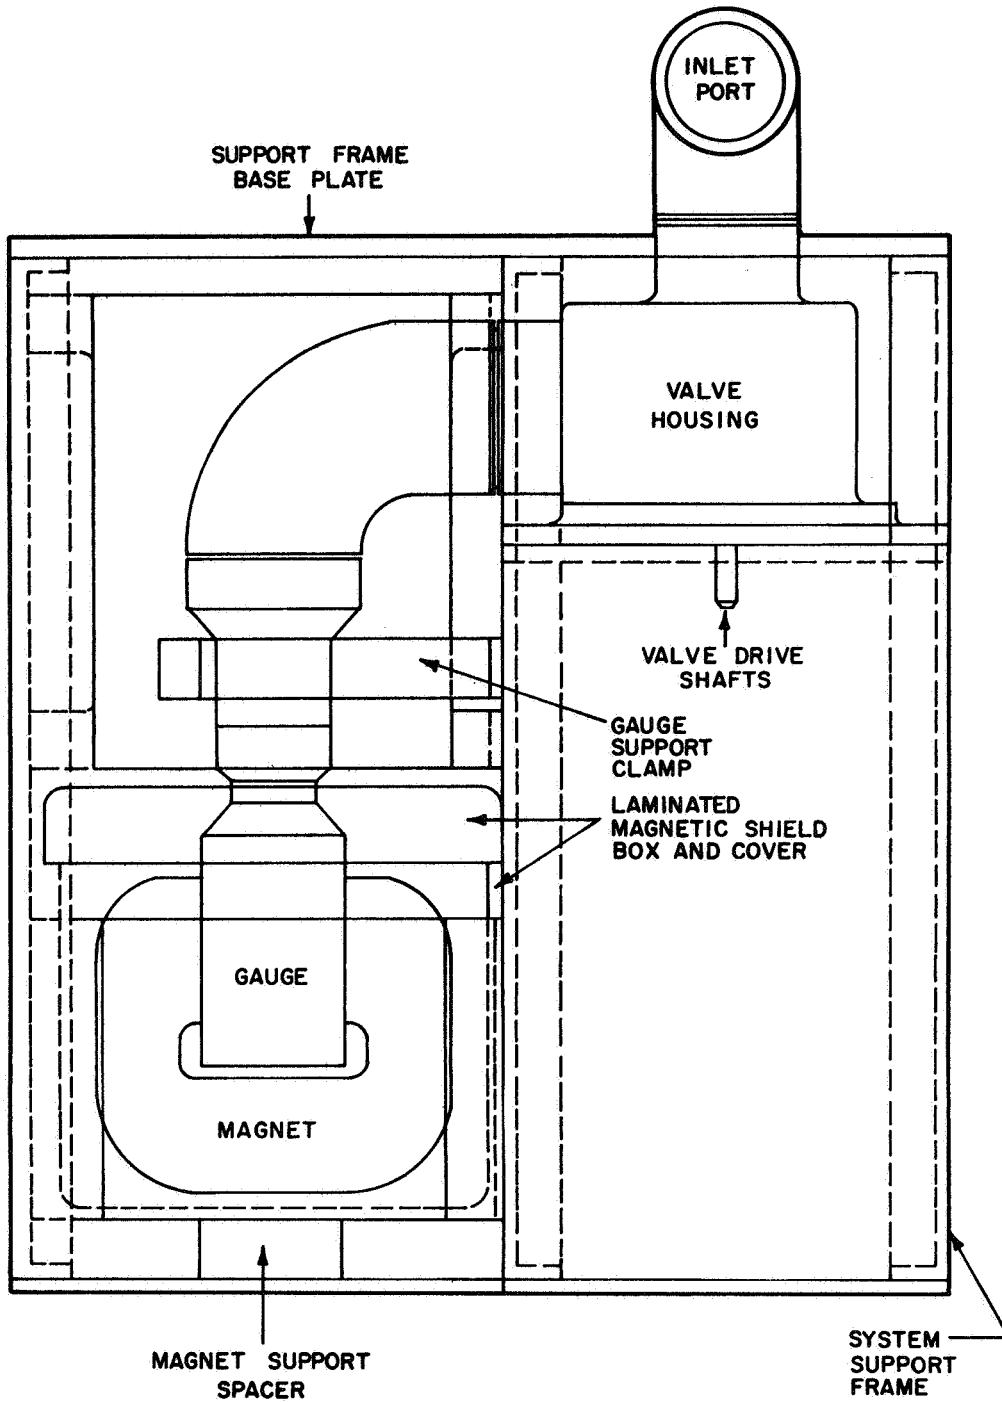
Side view of linear reciprocating valve version of yaw attitude sensor package.
